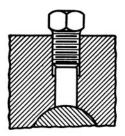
Here the plug is in the form of a rod, which allows the use of a short set-screw. This saves tapping a long hole and using a long screw.
